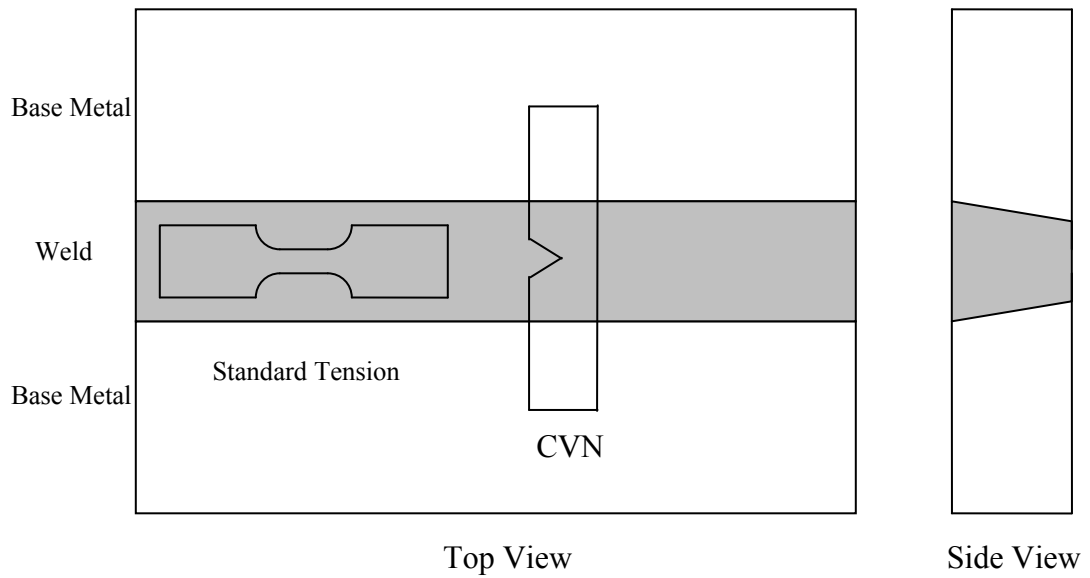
Detail of plate assembly (in accordance with ANSI/AWS5.20) indicating the extraction of all-weld tension coupons and Charpy V-Notch specimens
